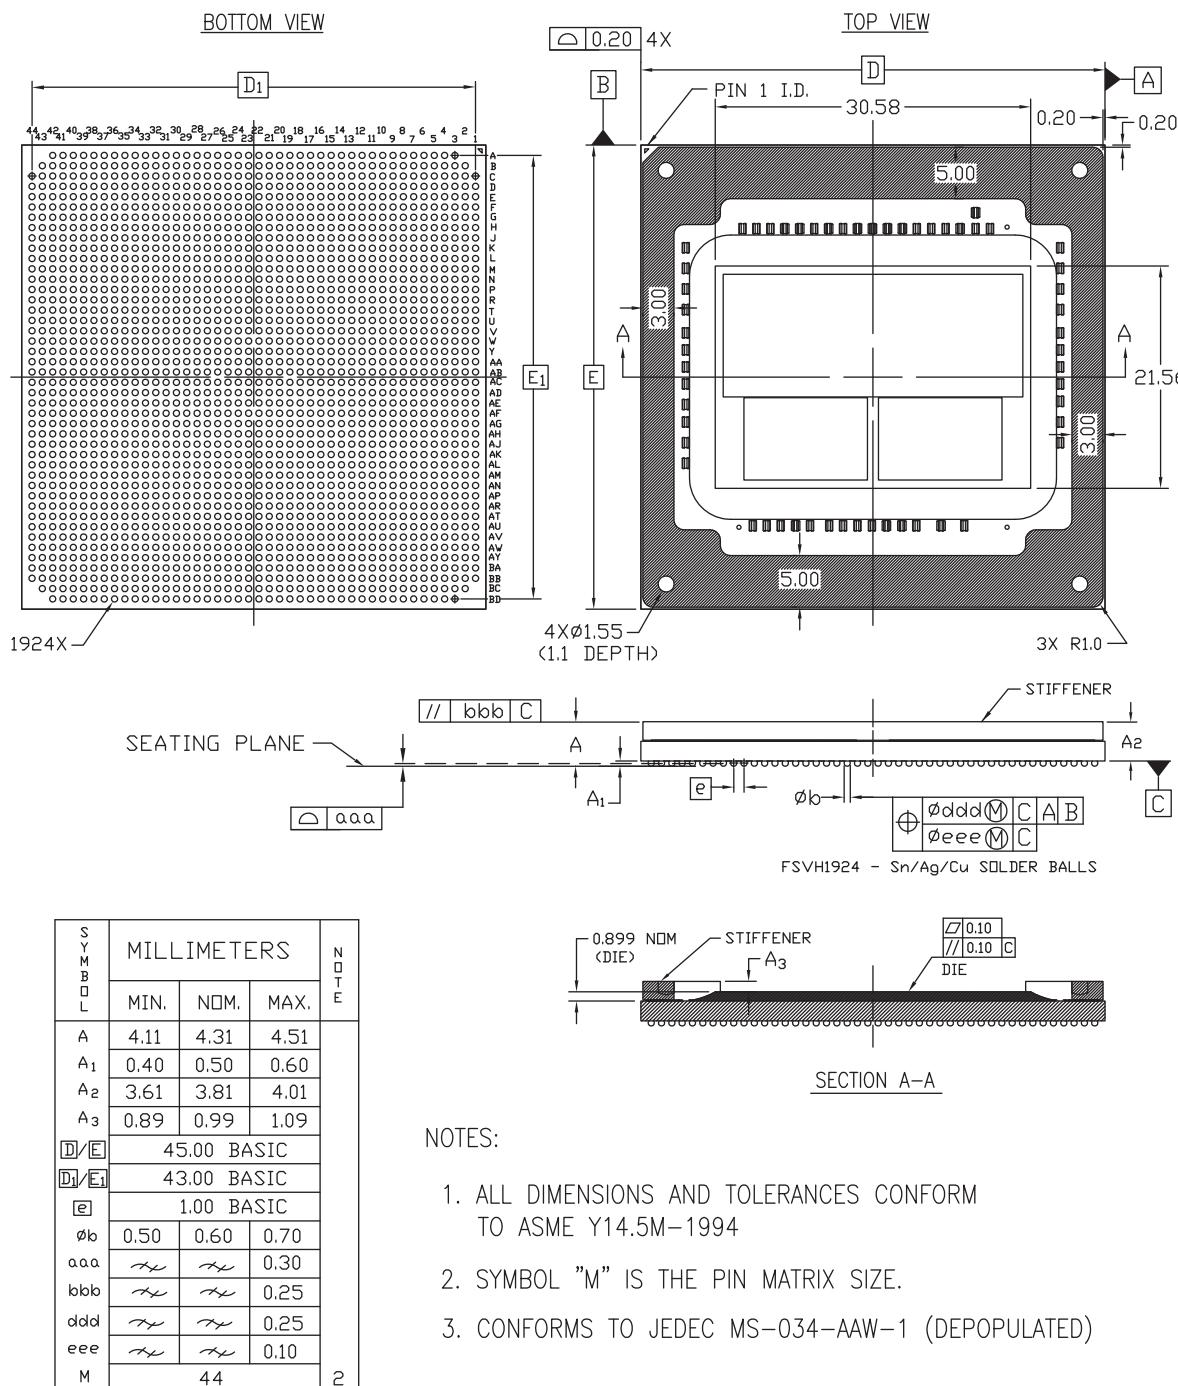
Package Dimensions for FSVH1924 (XCVU31P)
